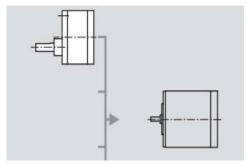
Motor and gearbox arrangement (Taken from Specification)
